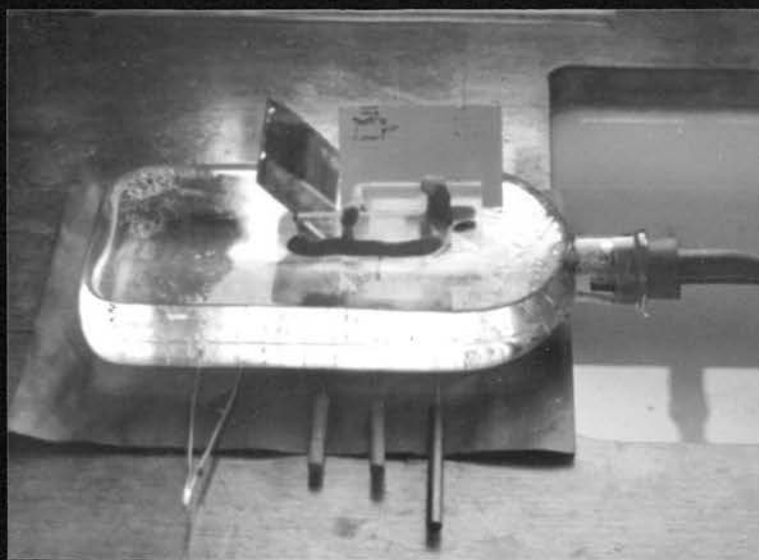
Close-up of bottle-mould assembly of Fig. III.1.
